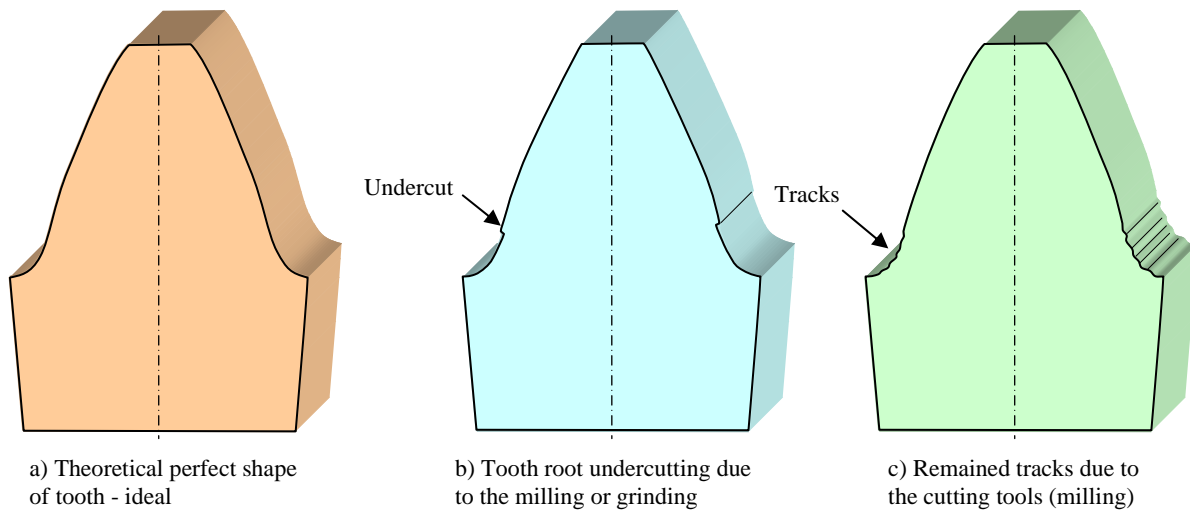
In the tooth root are frequently presented defects due to the mechanical treatment
